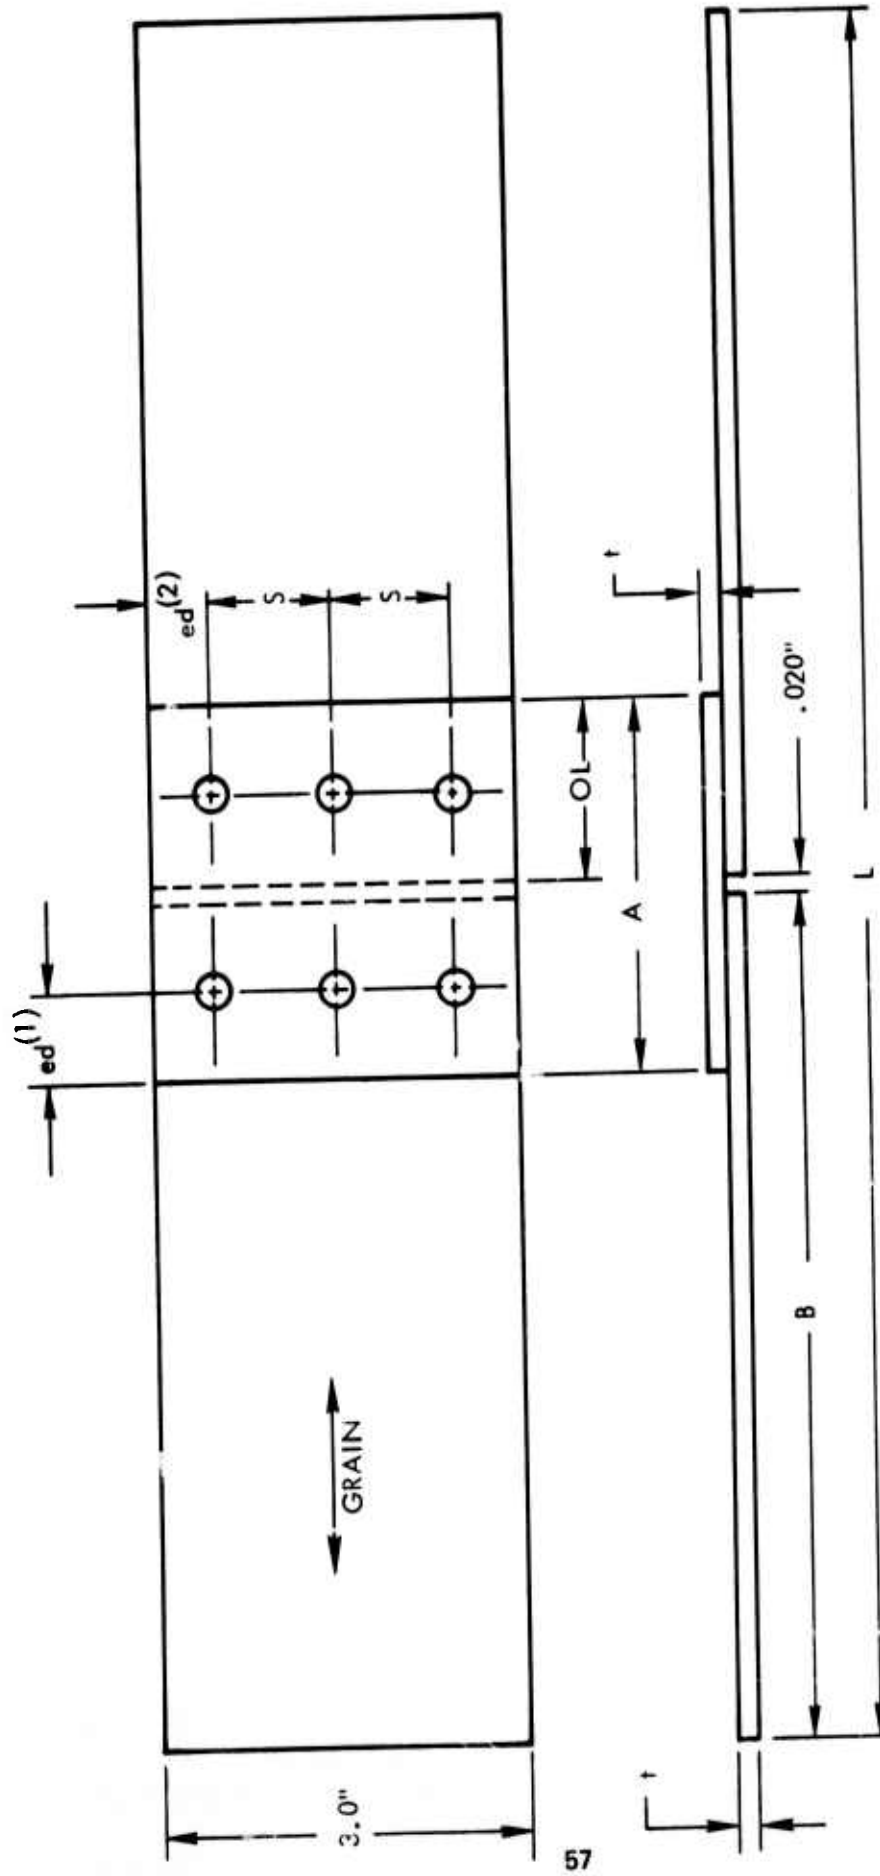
CENTERED ROW WELD PATTERN SPECIMEN (3 WELD SPACING)
